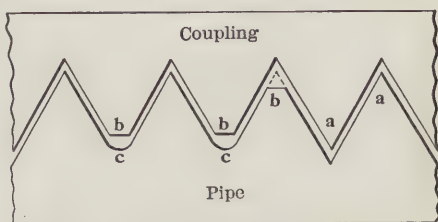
COMBINED DEFECTS OF DULL DIES AND DEFICIENCY IN PIPE AND FITTING STOCK
